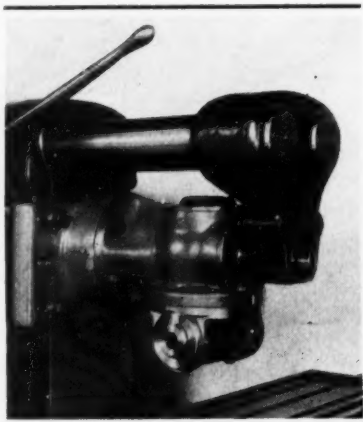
B & S Milling Attachment which can be Set at Any Angle
